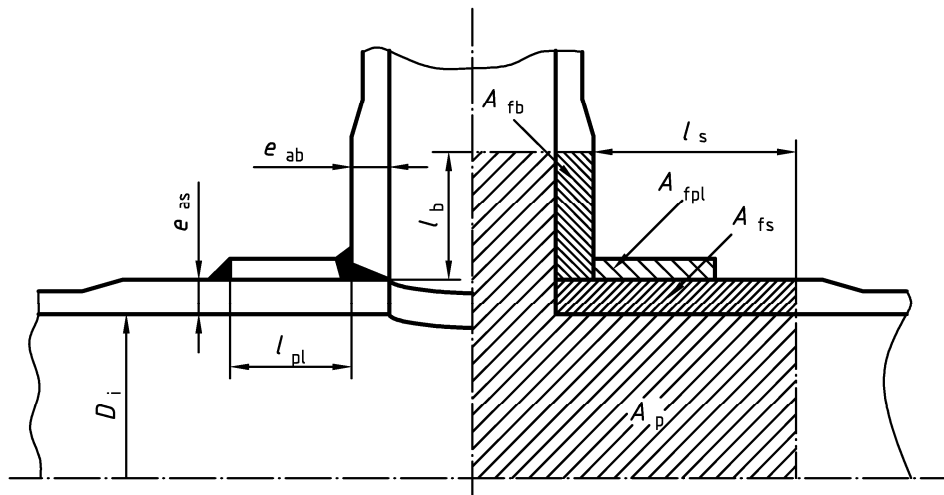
Reinforcement by reinforcing pad for a cylindrical shell
